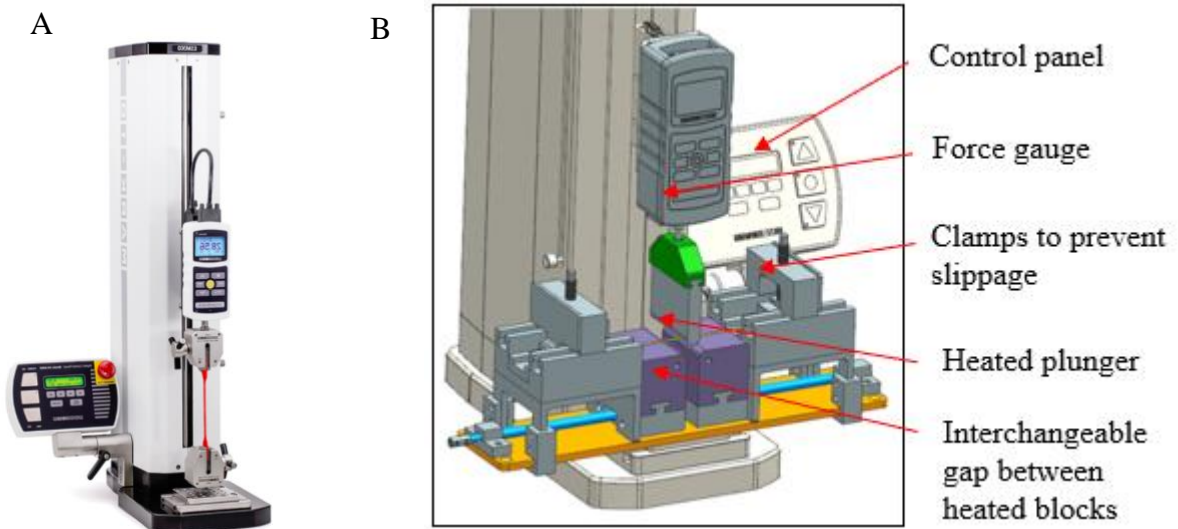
(A) Mark-10 ESM 303 (B) Novel forming fixture design model
